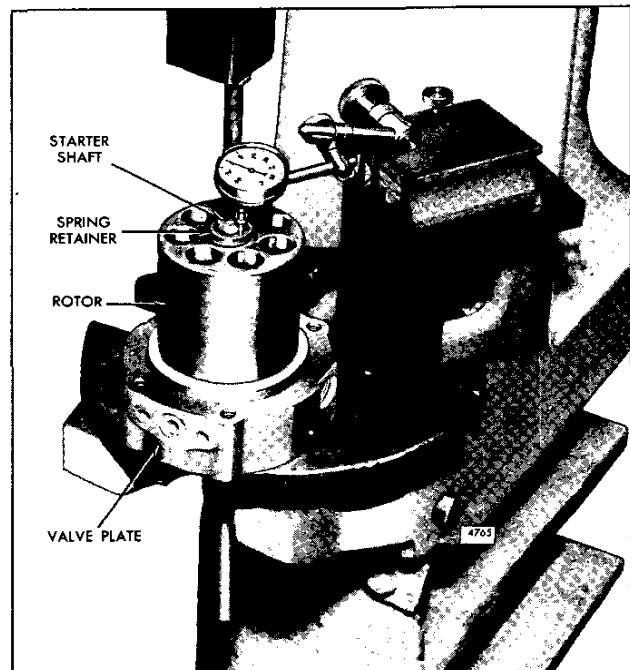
Checking Starter Shaft Travel (Series "20" Motor)
